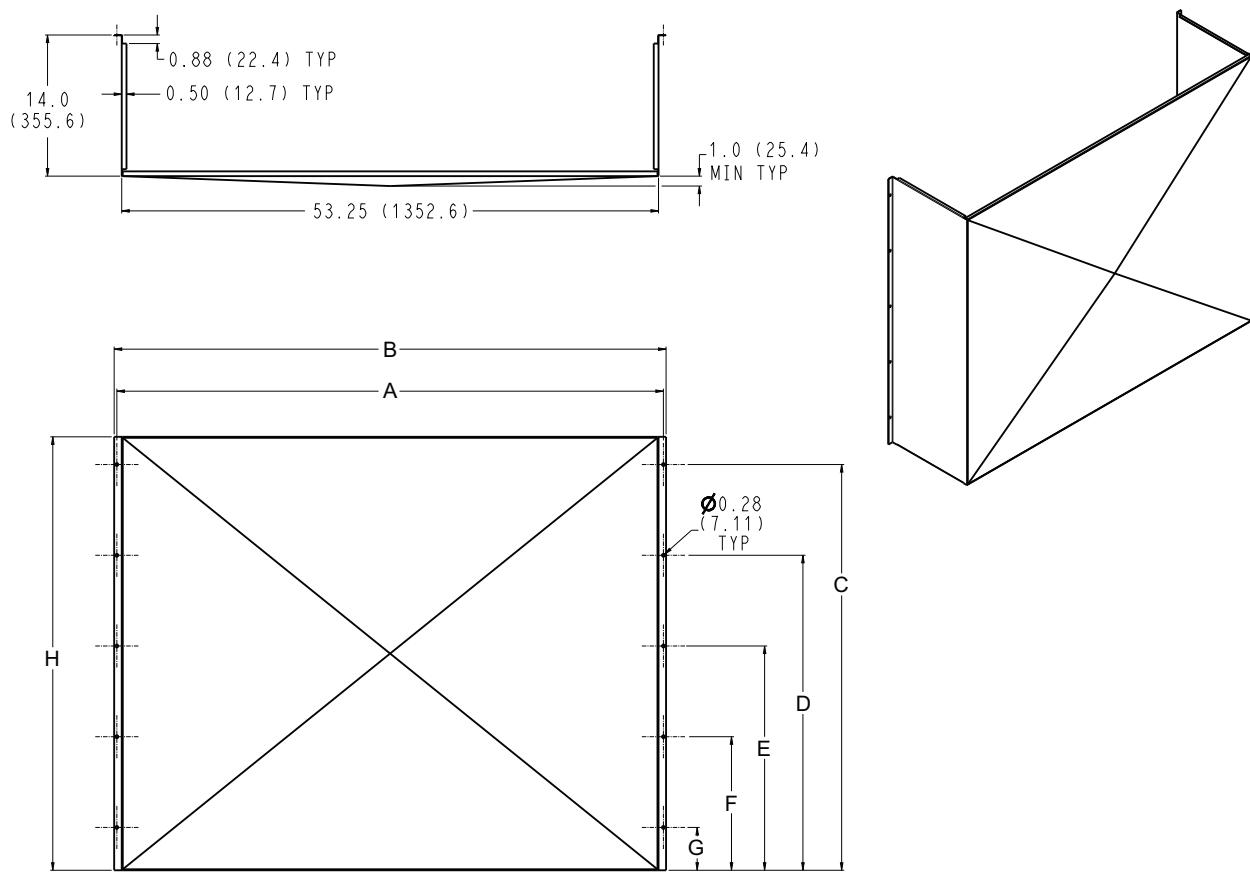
Cabinet C — Side Baffle I (Front/Top View)
